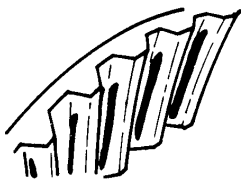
Properly Adjusted Gear-tooth Contact.
